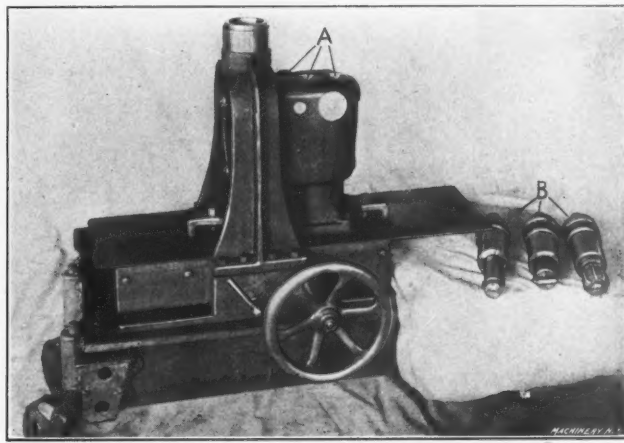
Indexing Jig for Boring and Reaming the Four Valve Cage Holes
